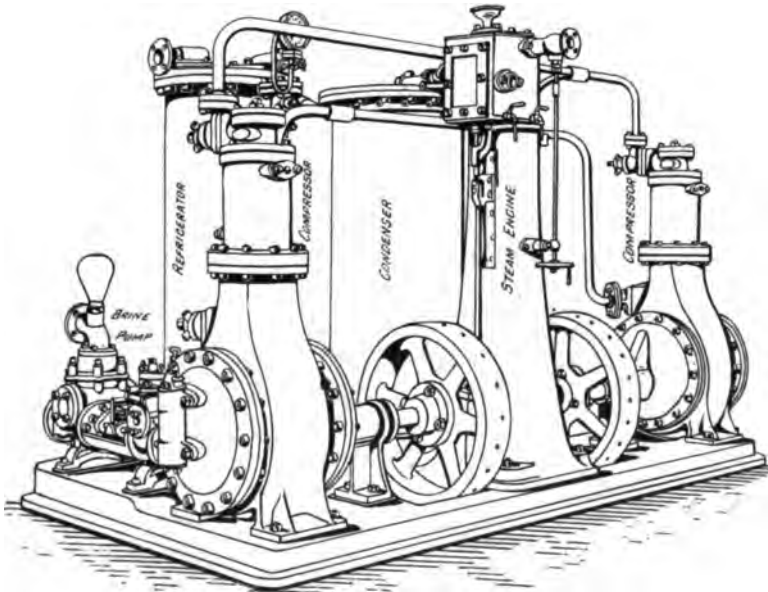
ENGLISH MACHINE, KILBOURN ENCLOSED TYPE.
